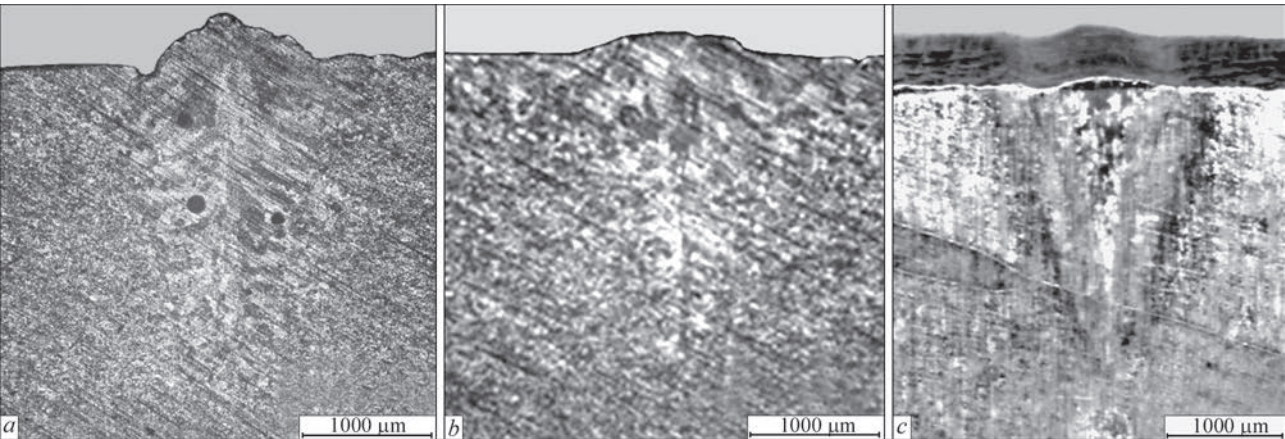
Cross-sectional view of the penetration zone under selected modes of producing circumferential welds: a — for plugs: $V_w = 10$ mm/s, $A_s = 0.8$ mm, $I_w = 55$ mA; b — for nipple: $V_w = 7$ mm/s, $A_s = 0.8$ mm, $I_w = 30$ mA; c — the same with a smoothing pass $V_w = 10$ mm/s, $I_w = 45$ mA
